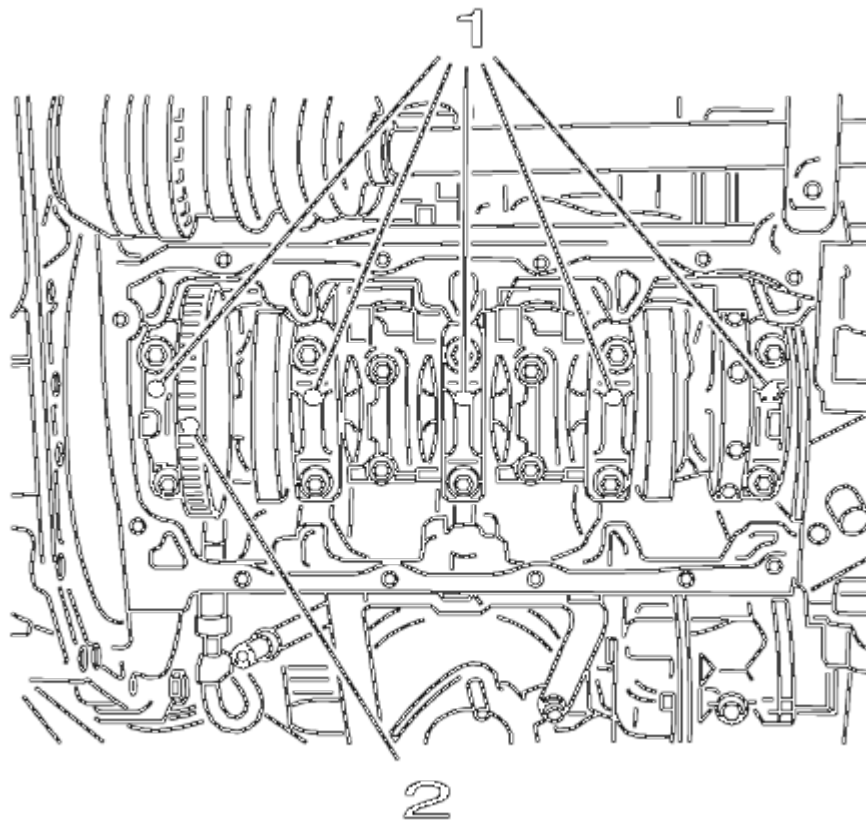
View Of Crankshaft Bearing Cap Bolts
